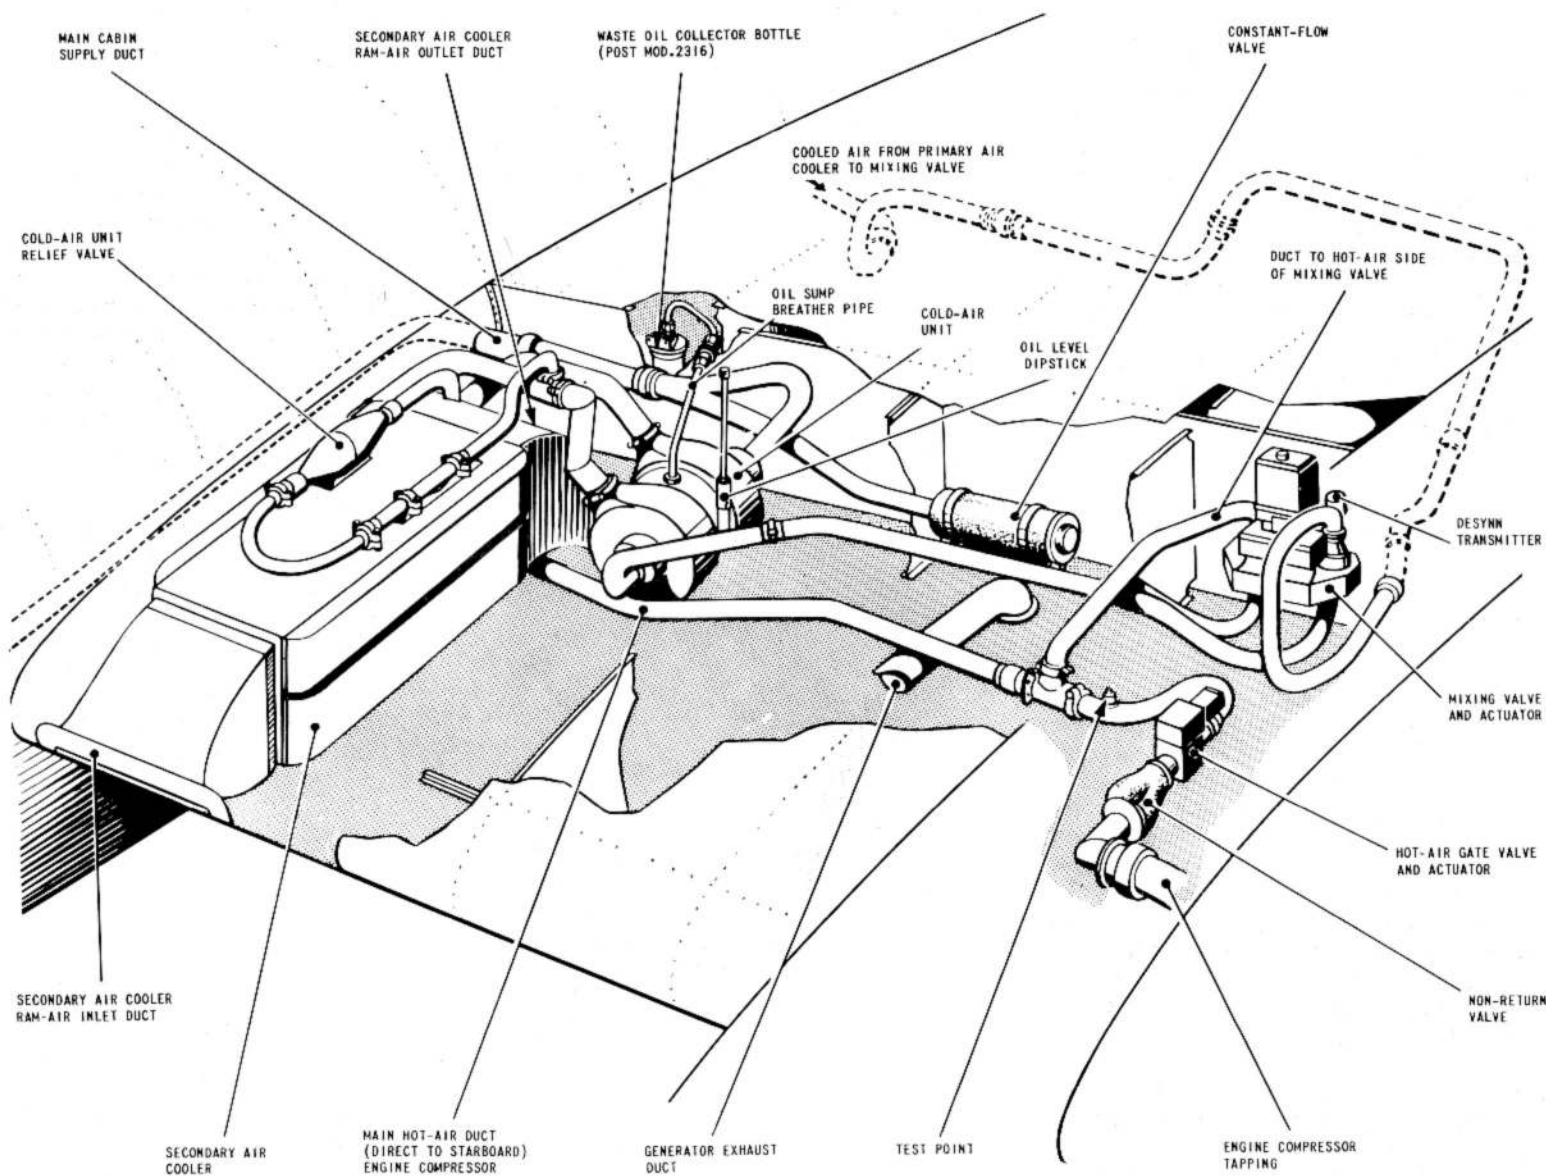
AIR CONDITIONING SYSTEM - PORT INNER-WING, LEADING EDGE
